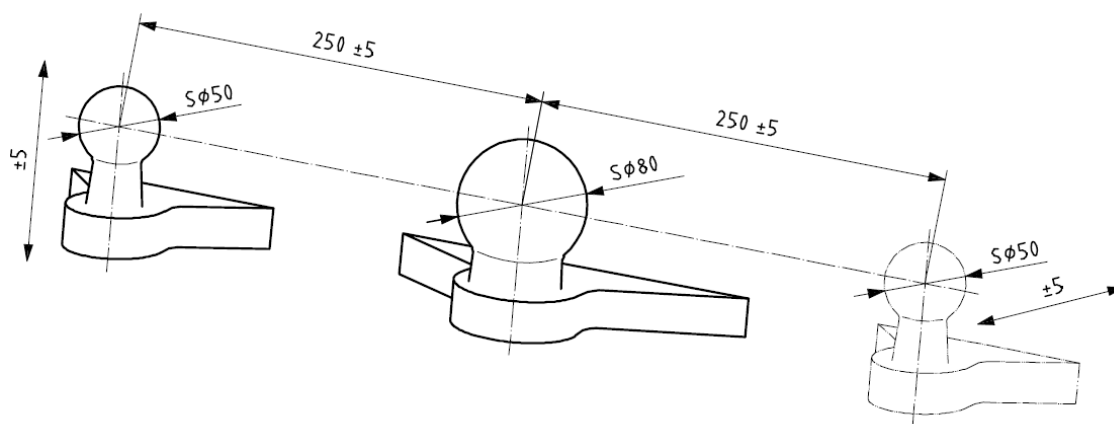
The distances between the trailer drawbar and steering drawbar eyes in millimetres
